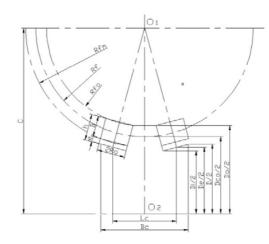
Major geometric parameters of globoidal indexing cam mechanism
